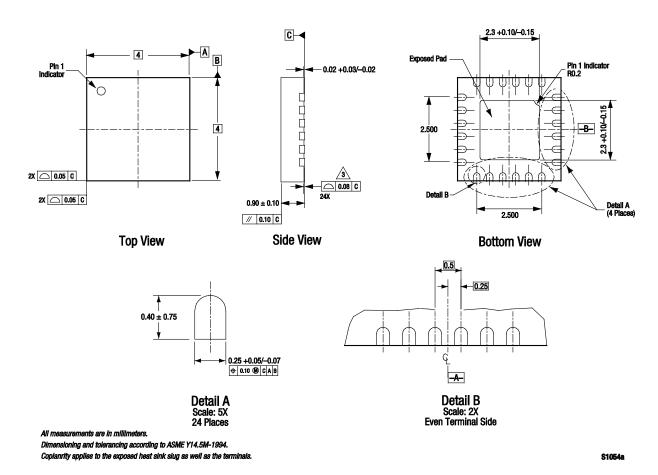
SKY73092-459LF51 24-Pin QFN Package Dimensions
